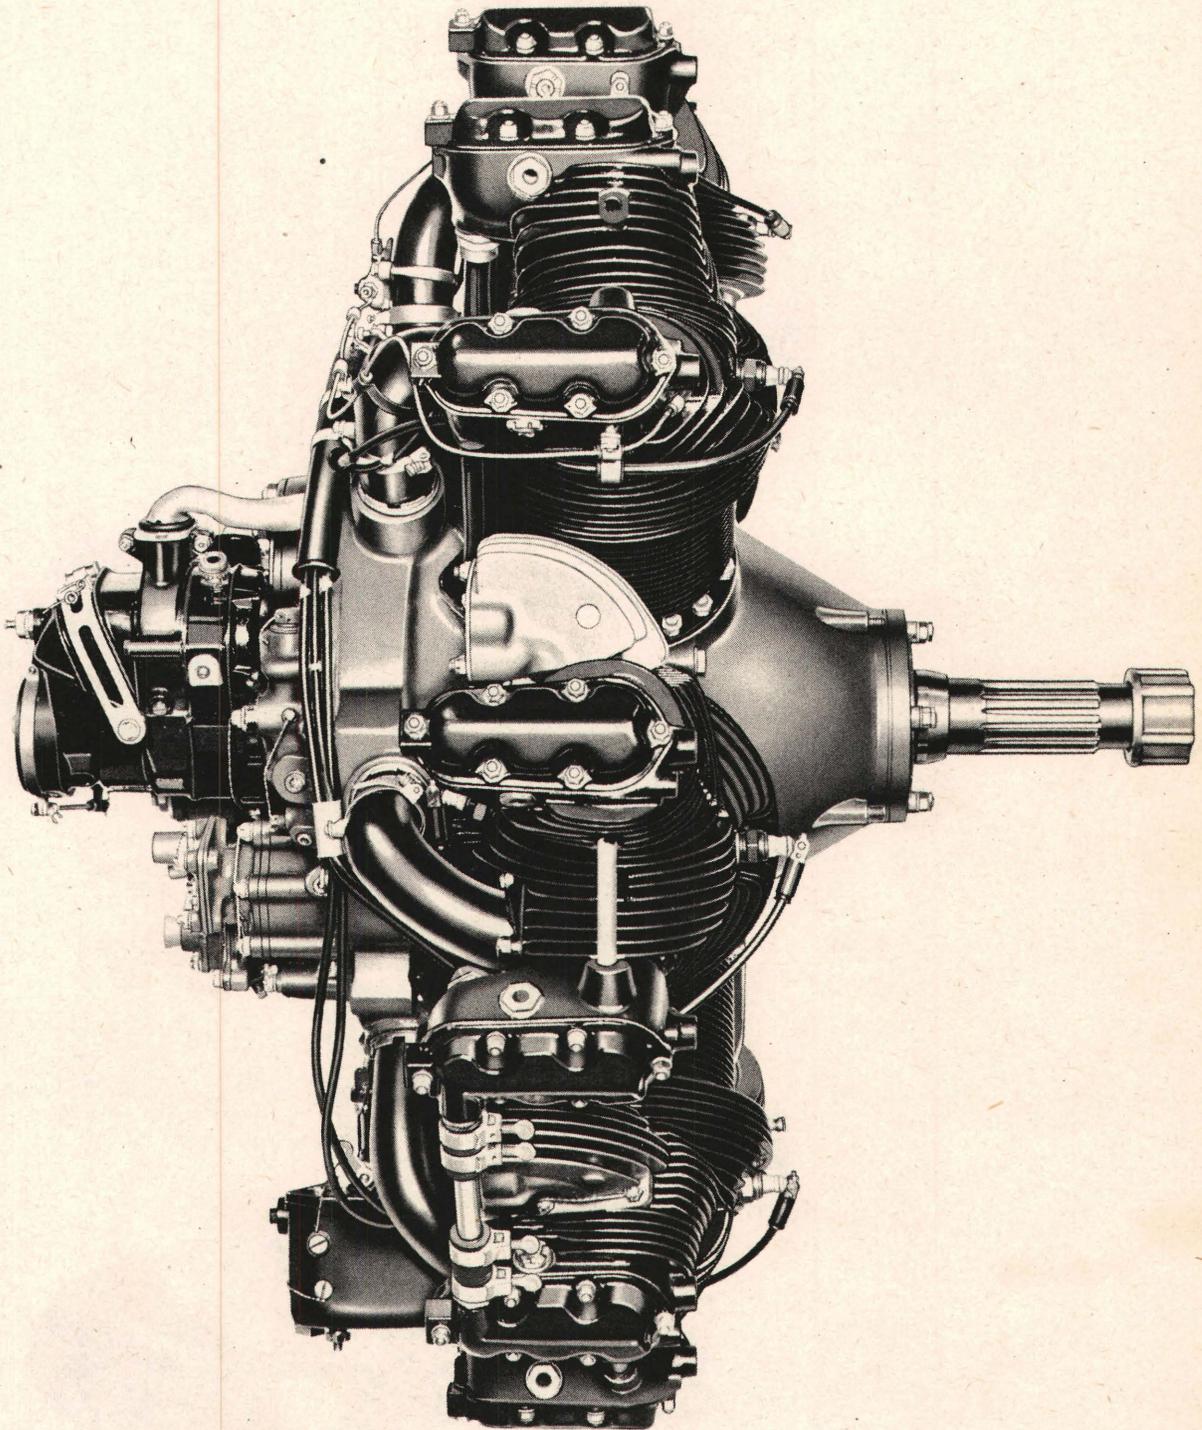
Right Side View of R-670-4, -11 and -11A Engines
